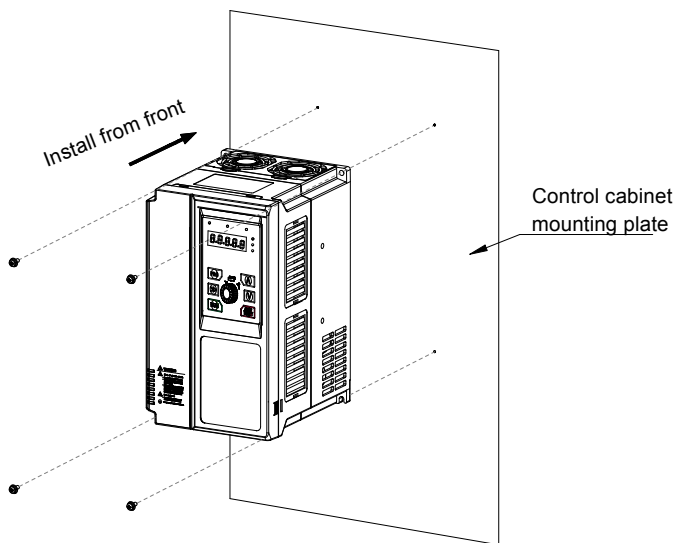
Wall-mounted Installation Diagram of Plastic Structure
